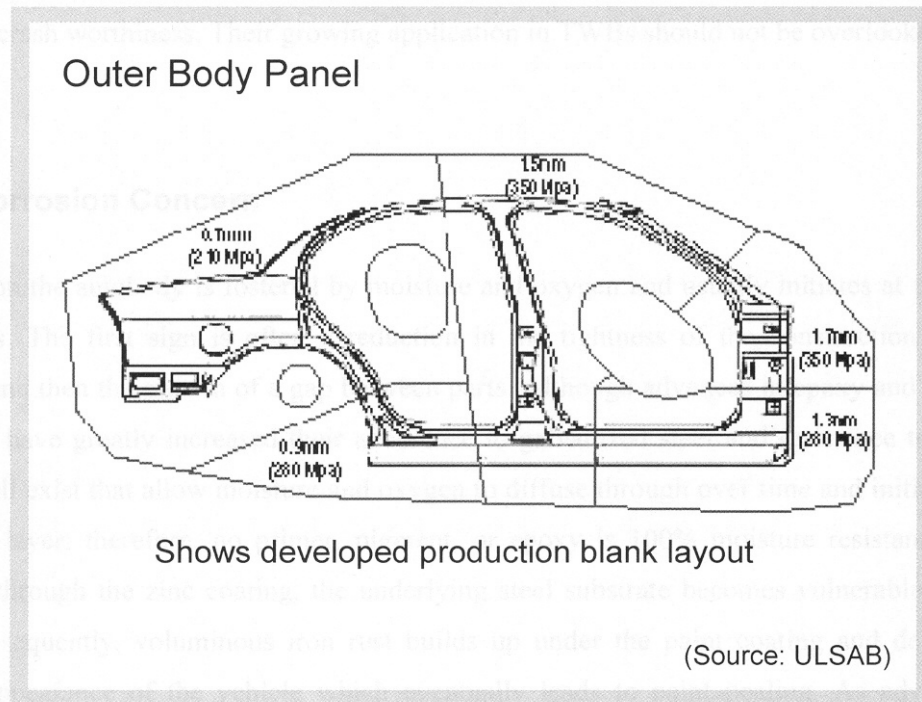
Outer layer of body side panel with over 4.8m of weld (2001)
